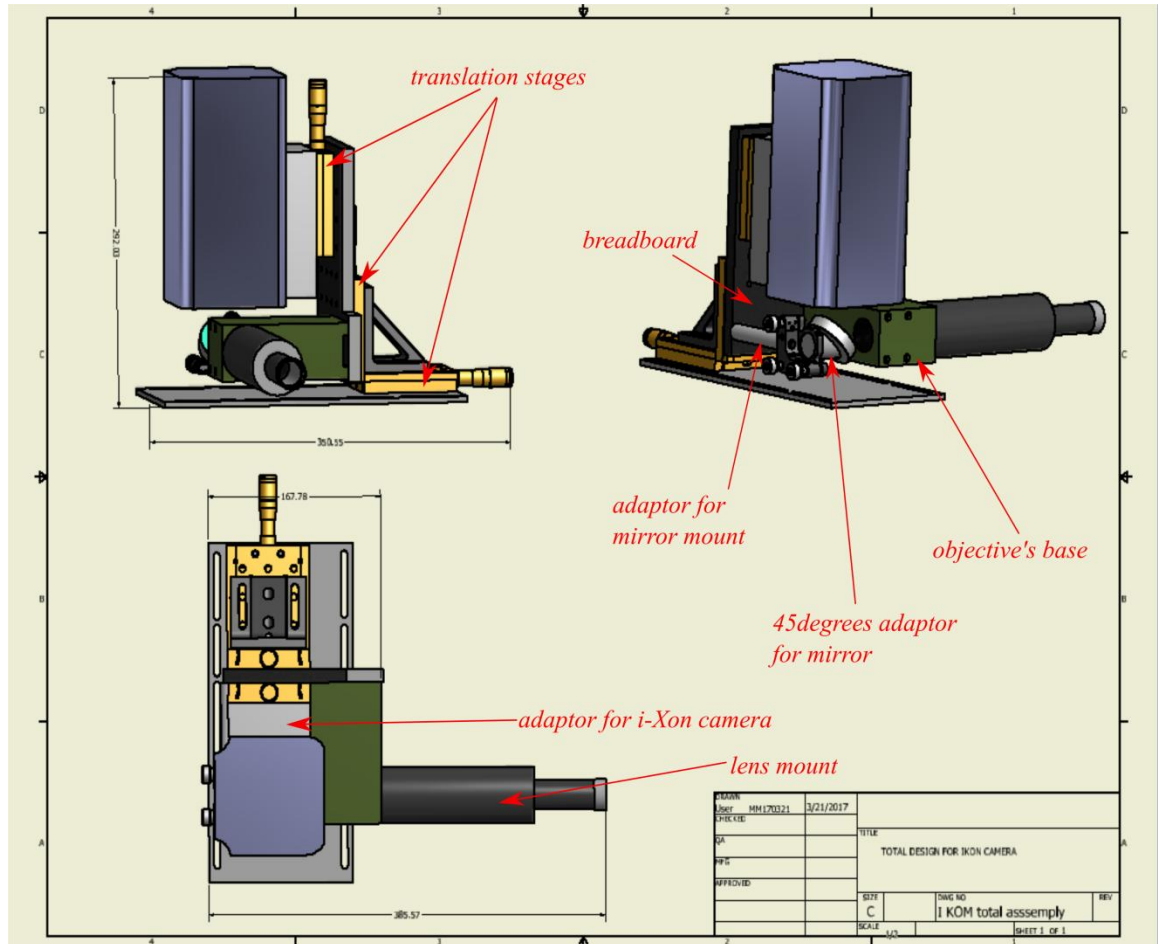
Total assembly of the opto-mechanical design for i-Kom ccd camera. Custom designed parts are red marked. All the distances are specific and the parts fit together in order the whole setup get ready to replace the existing one.
